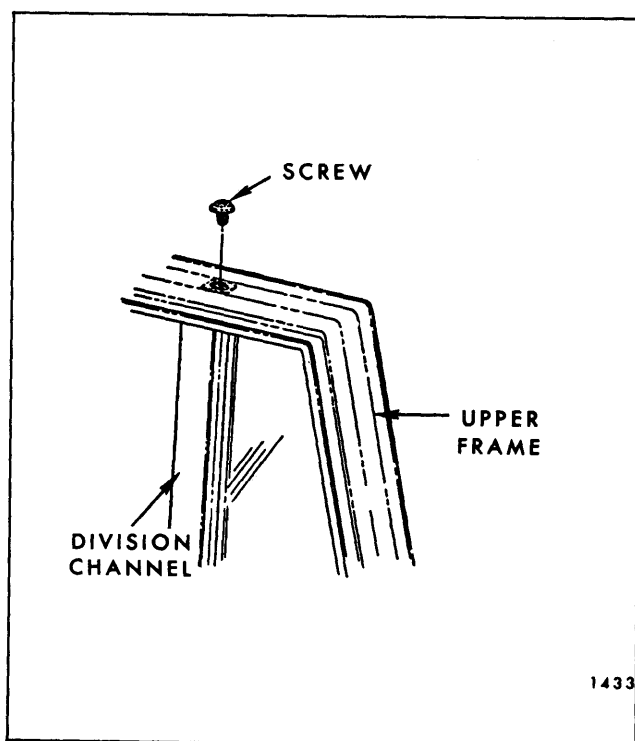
Rear Door Ventilator Attachment - "X" Styles
